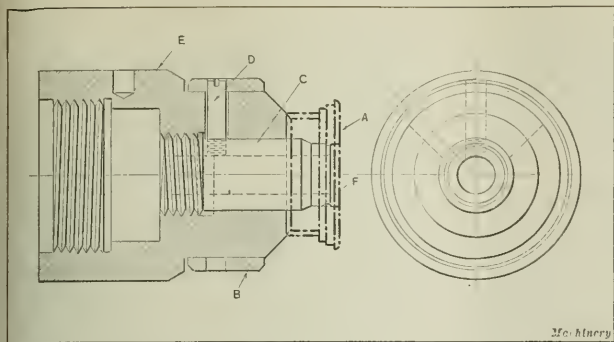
Screw Chuck provided with Arbor and Pilot Bearing
